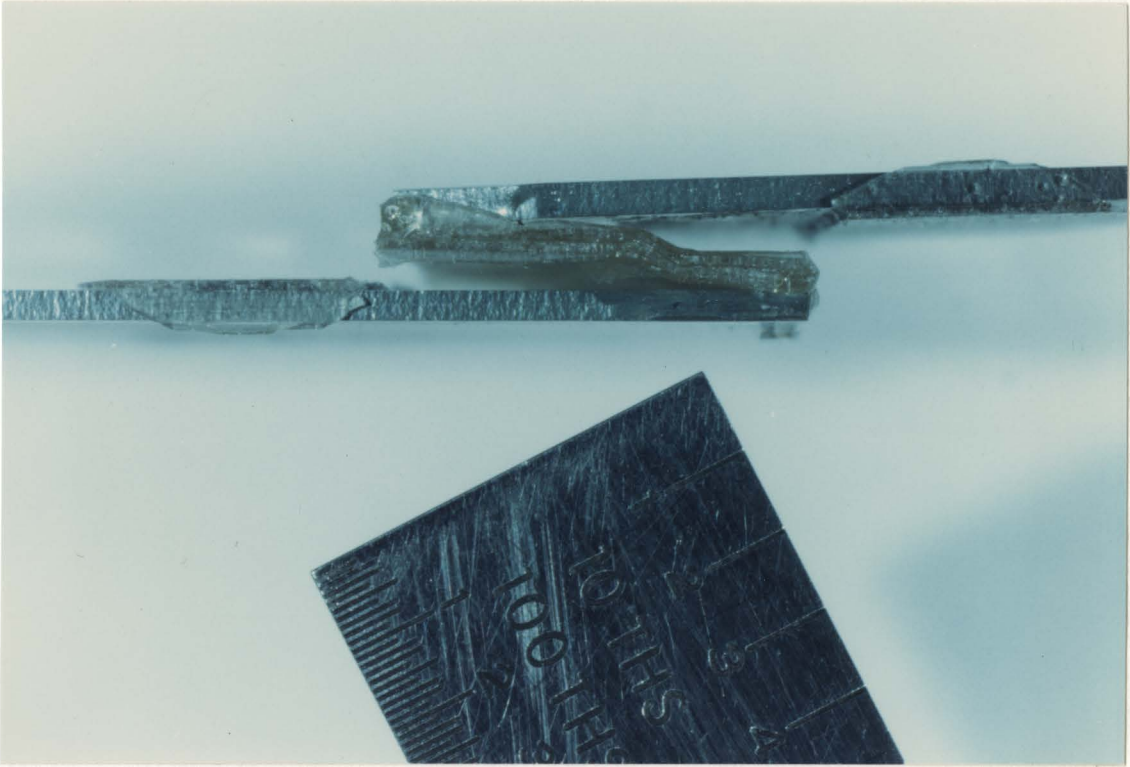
Photograph of Fractured Single Lap Bond (2X).
